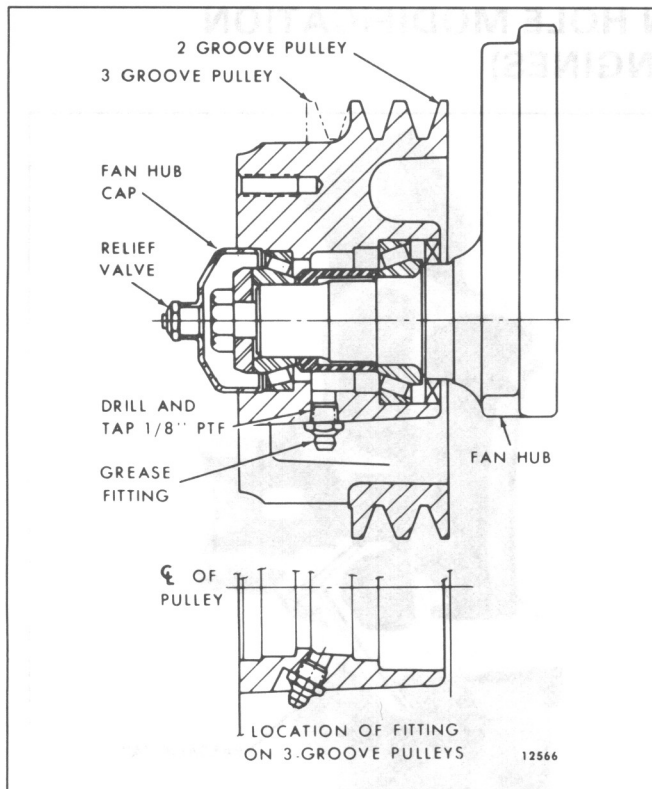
Location of Fan Hub Grease Fitting and Relief Valve
